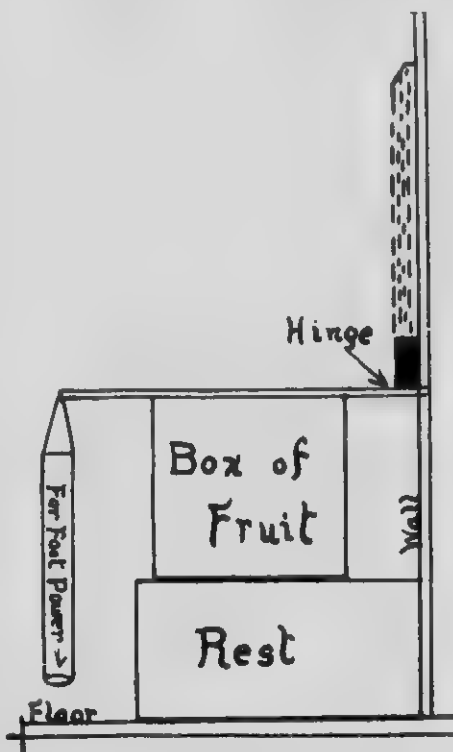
A HOME-MADE NAILING BENCH AND BOX PRESS.
